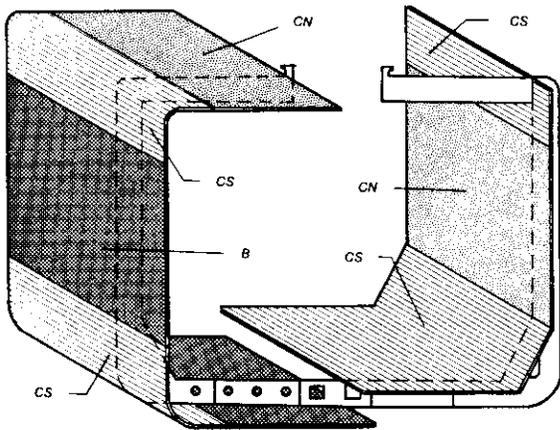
Fig. III. STRUCTURAL MATERIALS ARRANGEMENT CONCH CONTAINMENT SYSTEM
